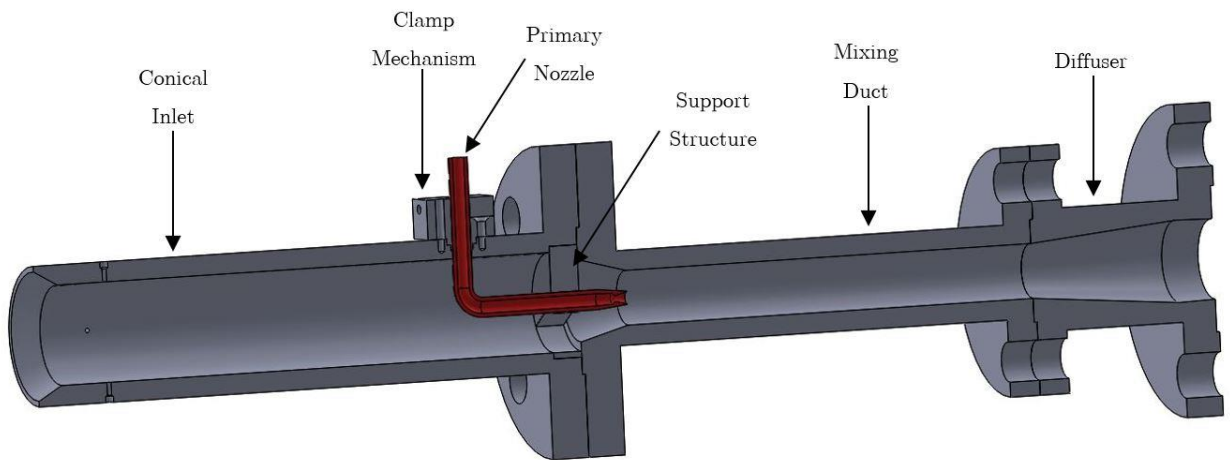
Section view of conical inlet, clamp mechanism, primary nozzle, support structure, mixing duct and diffuser
